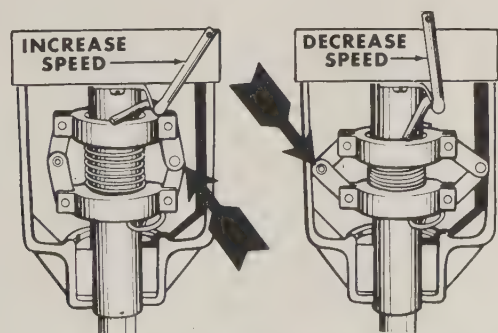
As the engine speed increases, the pivoted links fly out, causing the control arm to move the throttle valve toward a closed position. (Lawn Boy Division of Outboard Marine Corporation)
